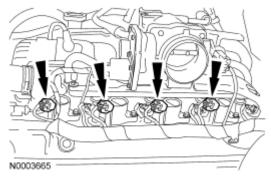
Ignition Coil Electrical Connectors Courtesy of FORD MOTOR CO.
